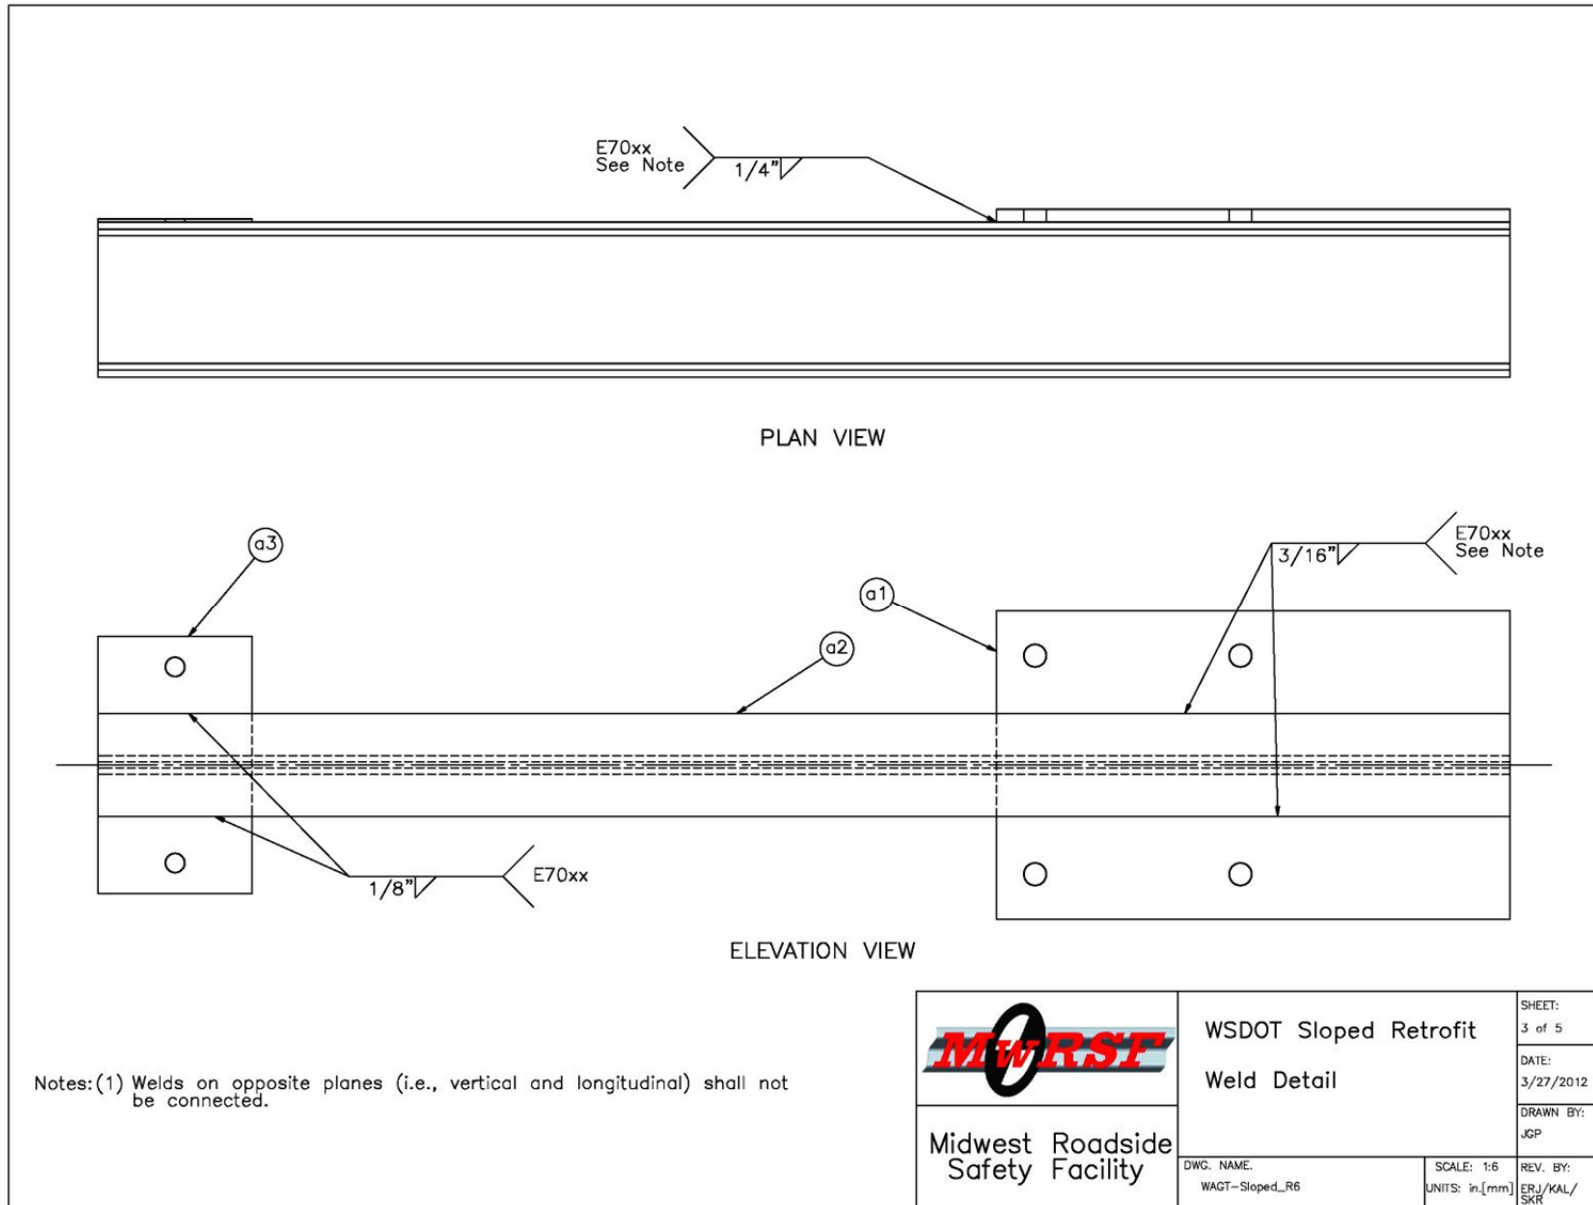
Retrofit 1 – Sloped-End Weld Detail
